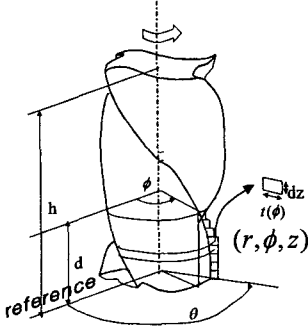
The 3-dimensional geometry of a milling cutter and element cut by the cutter
